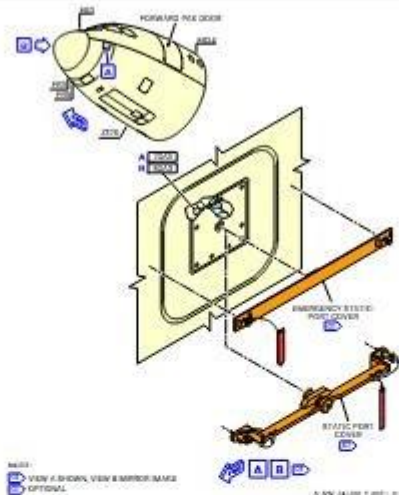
A (SHEET 1) - Sealing of the Static Probes
